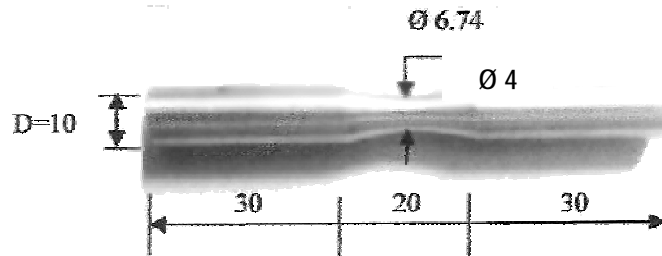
c) the shape and dimensions of fatigue-creep Specimen (All dimensions in mm)
